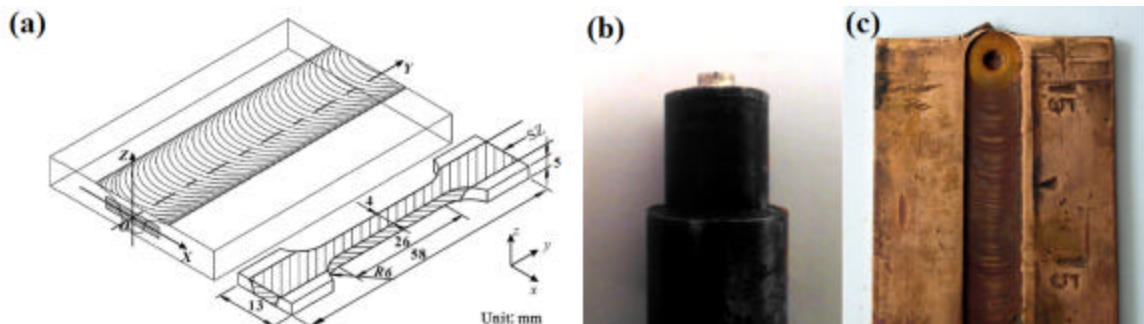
(a) Process illustration and tensile test specimen [13] (b) high carbon steel cylindrical tool applied for FSP (c) Defect-free sample
